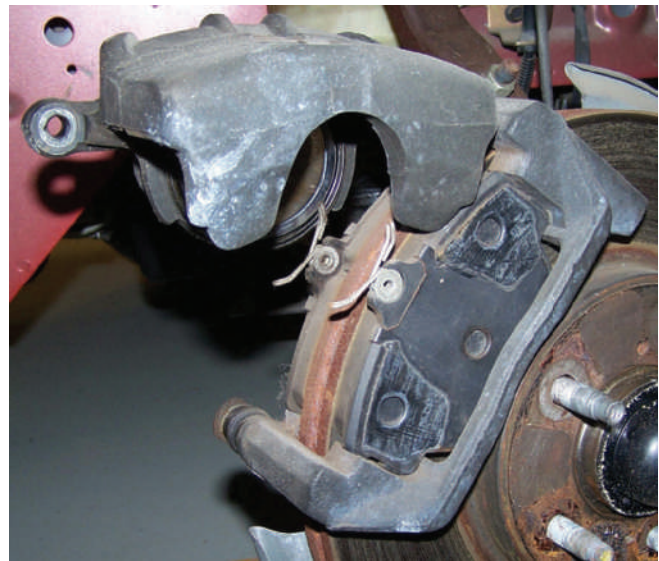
Some calipers can be rotated up on its upper mounting pin to replace the brake pads.
